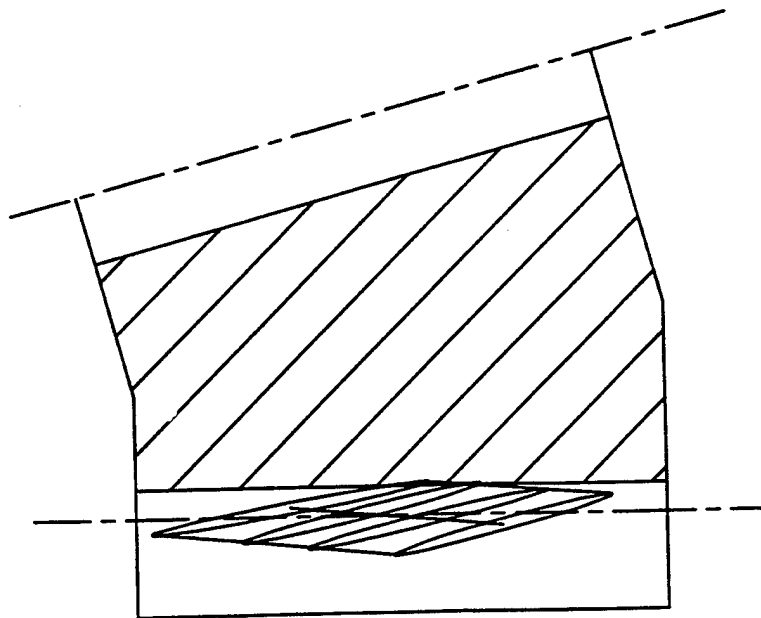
Longitudinal bearing contact for a misaligned gear drive ($\Delta\gamma = 3$ arc min.)
